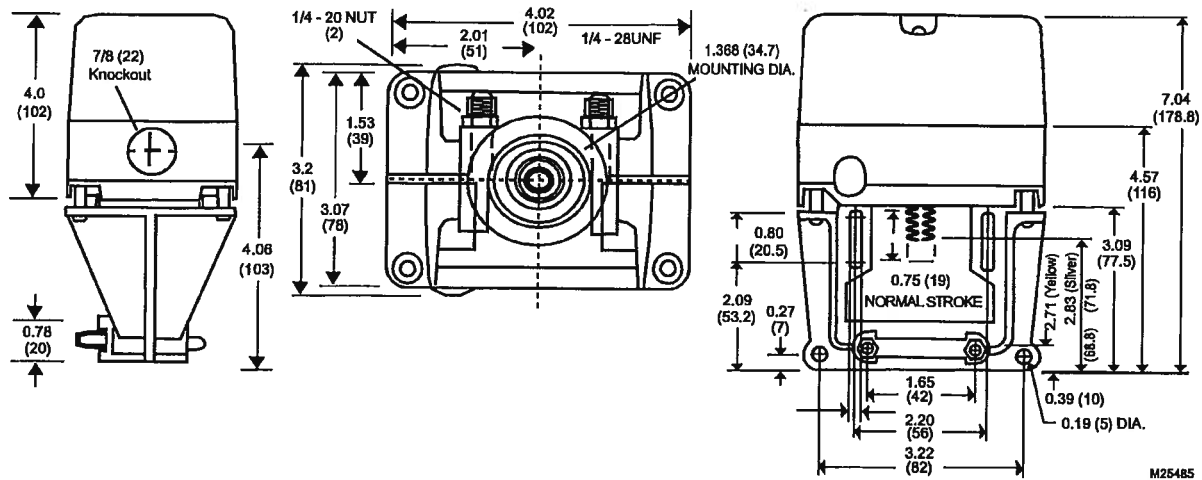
ML6984 Valve Actuator Dimensions, in. (mm).
